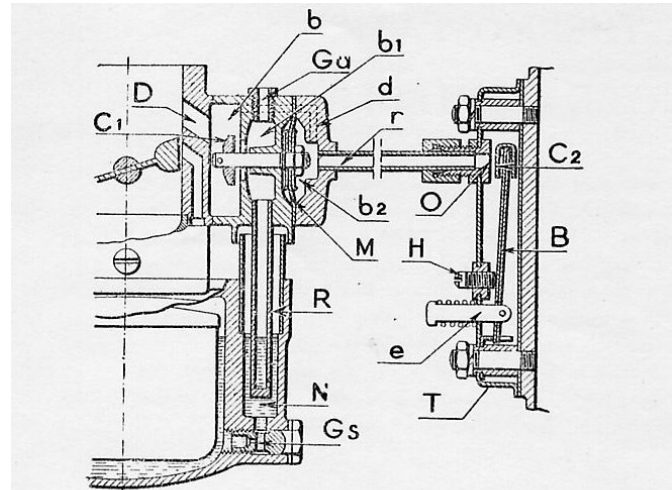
A section of the Solex Thermostarter showing the position of the bi-metal strip B when the engine is cold and the orifice O therefore open.
